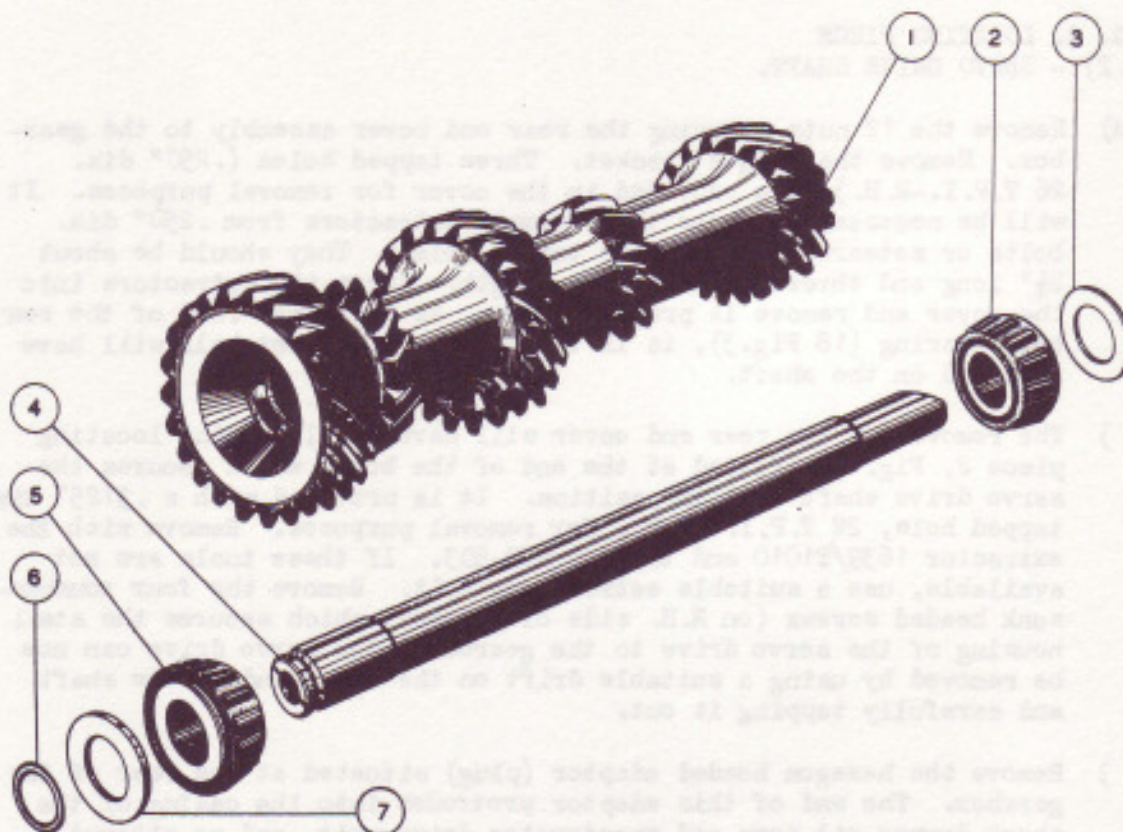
EXPLODED VIEW - 2ND MOTION SHAFT.
